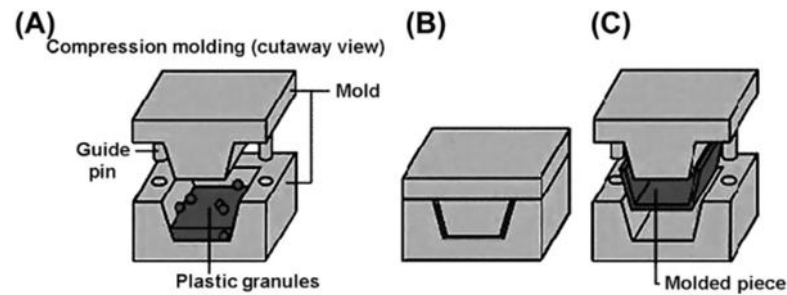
Schematic drawing of the stages of the compression molding process. (A) Filling the mold; (B) heating the closed mold; (C) opening the mold and removal of the molded part [32].
